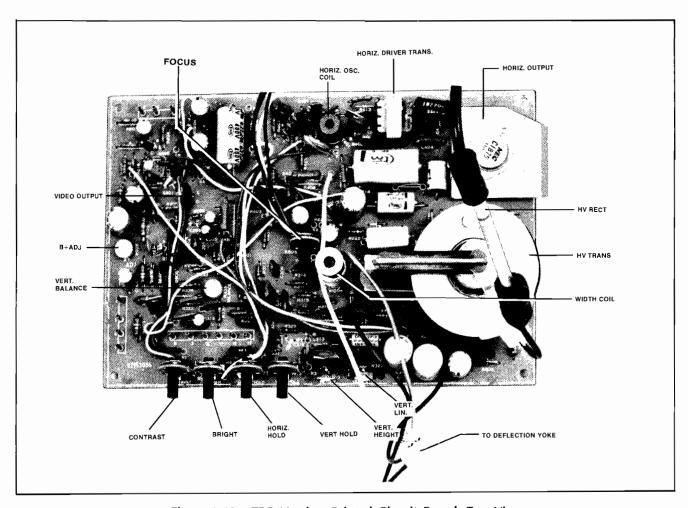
TEC Monitor Printed Circuit Board, Top View
